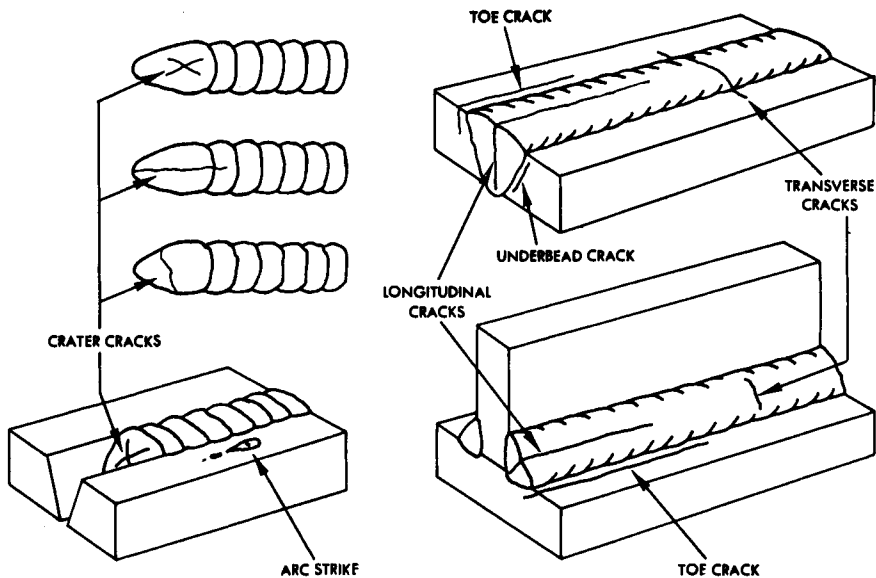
Cracks in welded joints.⁽¹¹²¹⁾
